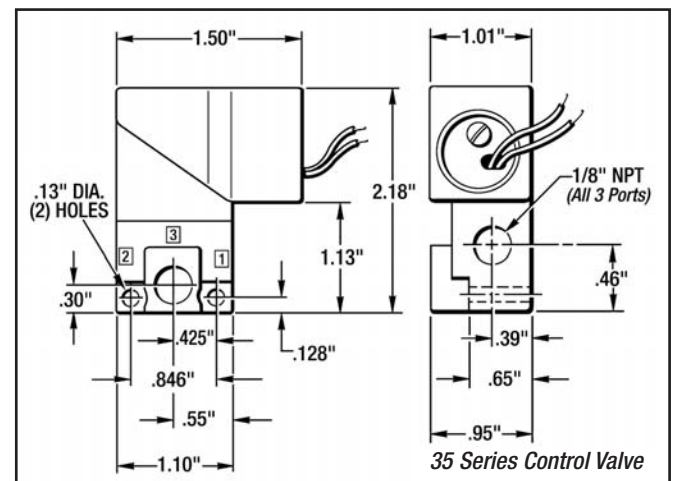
Valve Dimensions For Remote Mounting (XB1, XB2, XB3 and XB4)
